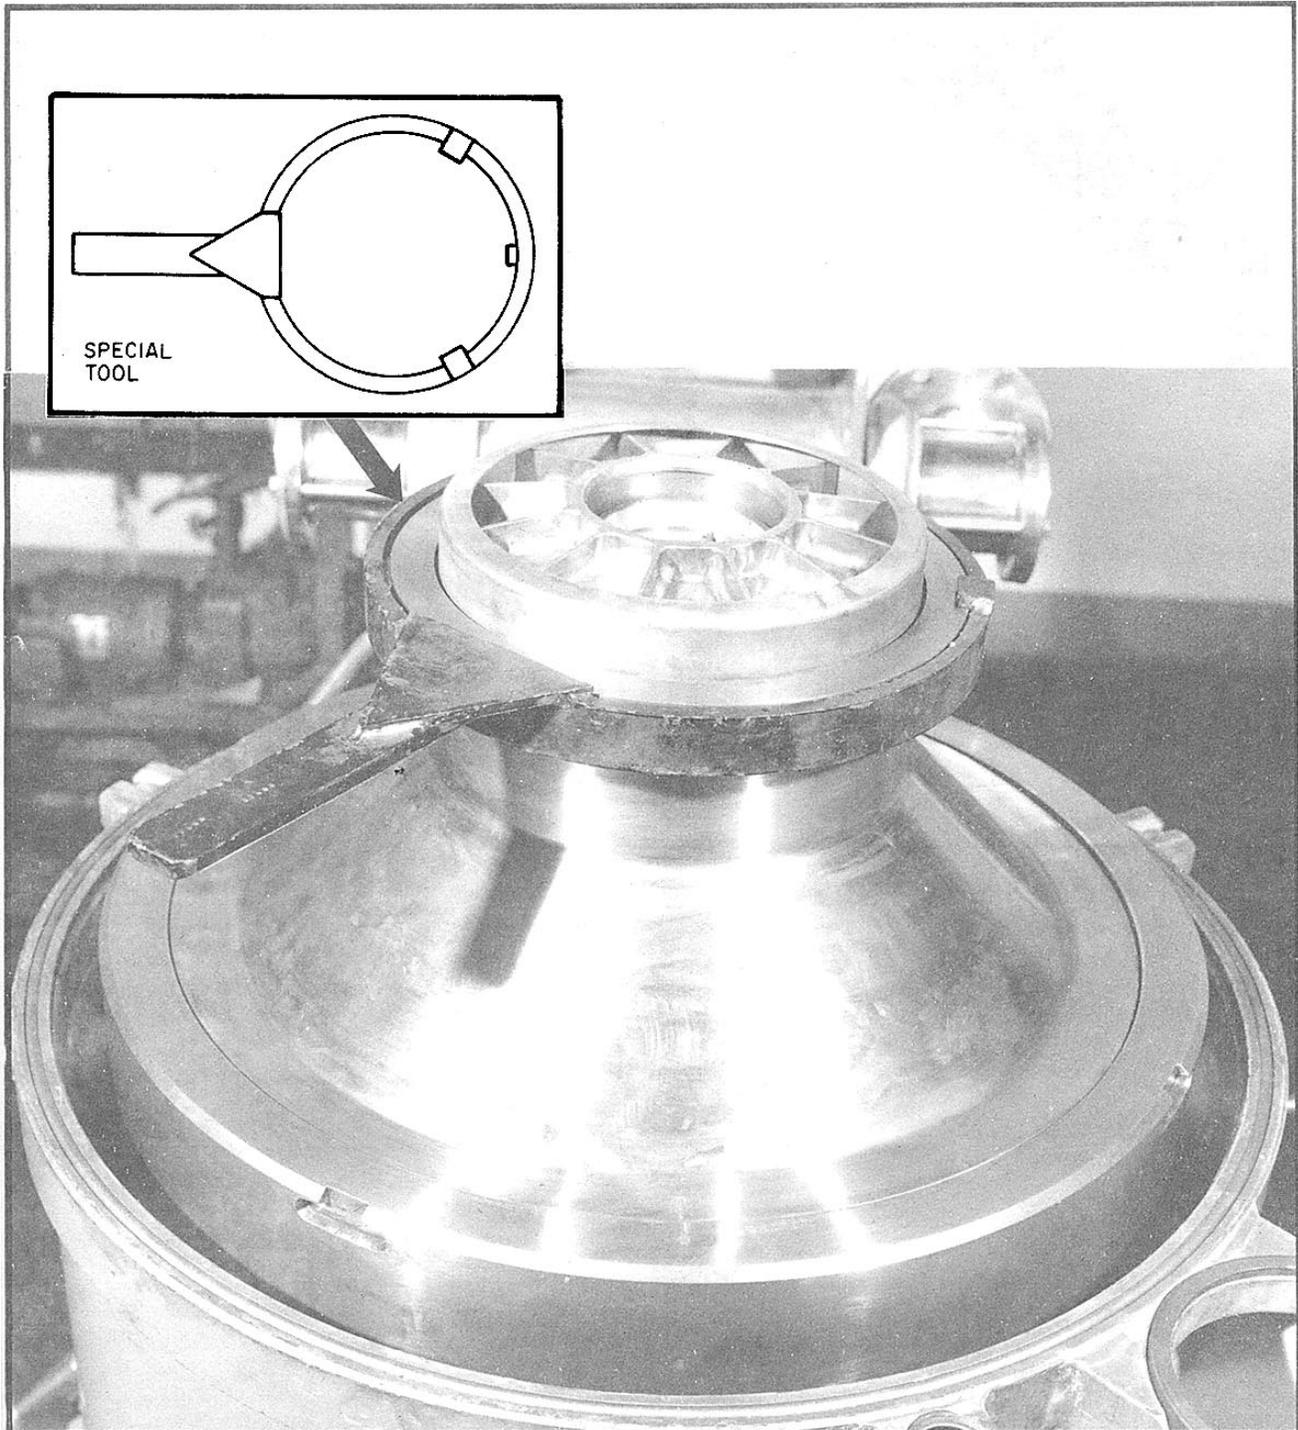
Removing bowl top coupling nut (with special tool).
